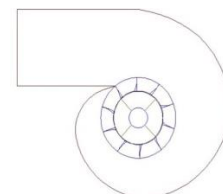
2D Drawing of Runner and Casing with Design Specification
